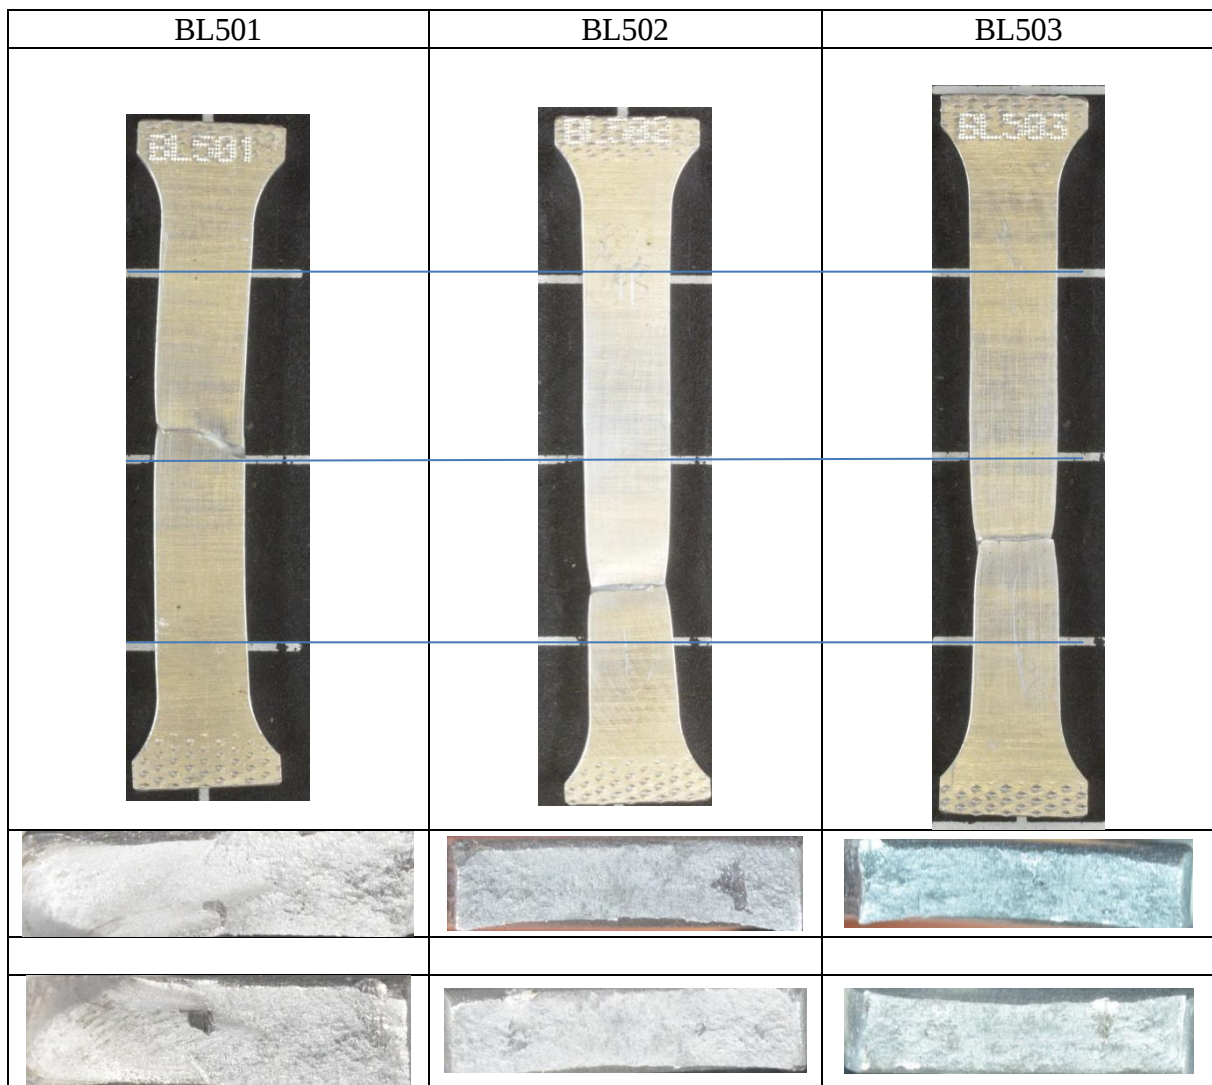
Fracture surface of AA5086-AA5086 welds at Lyon Arboretum 6-month exposure.
